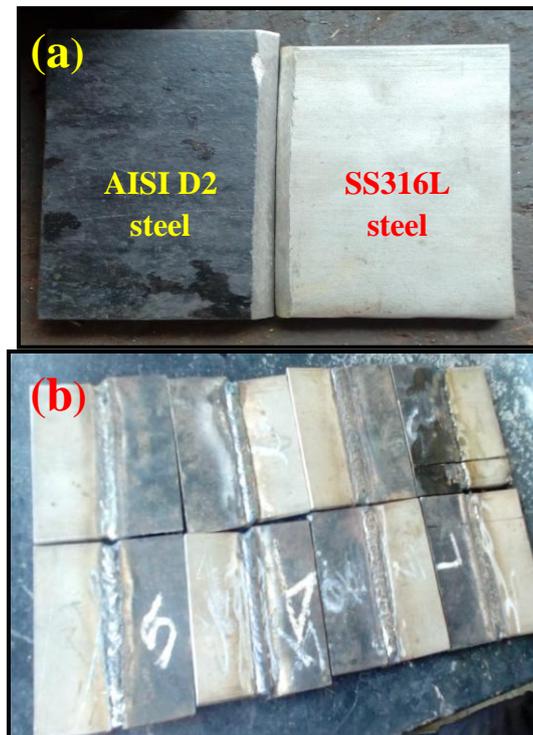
Weld metals (a) (b) Before welding and (c) After welding
